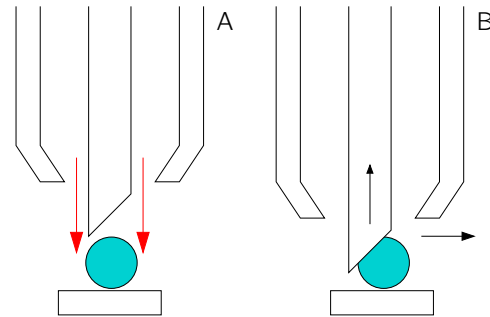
Selective removal of solder by melting with hot gas and removing with vacuum.
